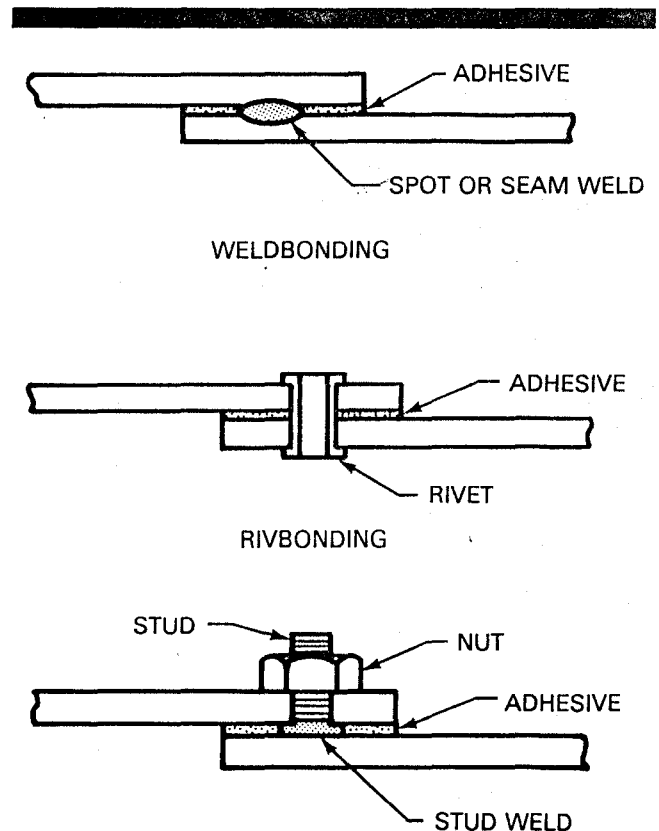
Adhesive Bonding in Combination with Resistance Welds and Mechanical Fasteners
